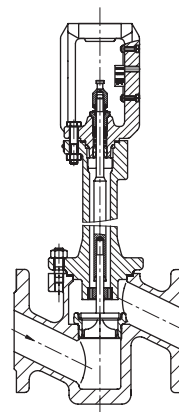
Type 3241 Valve, forged steel version, DN 15 to 80, with insulating section
